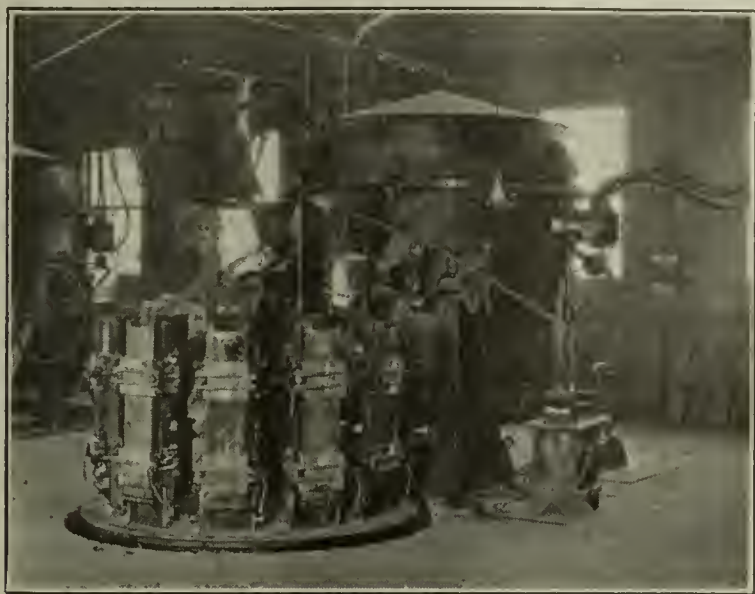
BAILY FURNACE AND CASTING TABLE USED FOR MELTING STEEL
